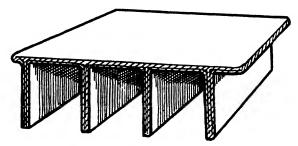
Aircraft Flooring made of Plastic-bonded Plywood
